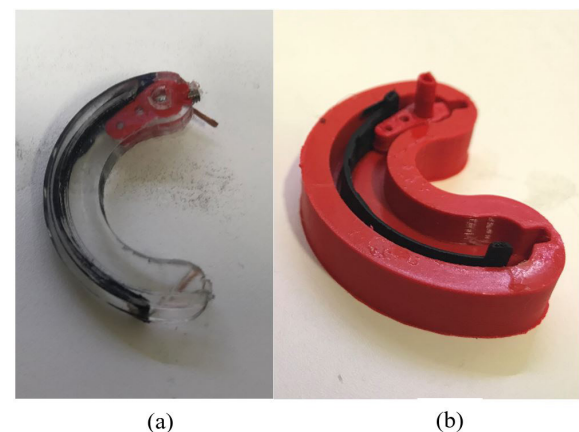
(a) Soft sensor embedded C-leg (Composite C-leg) and (b) its sensor placed mold
